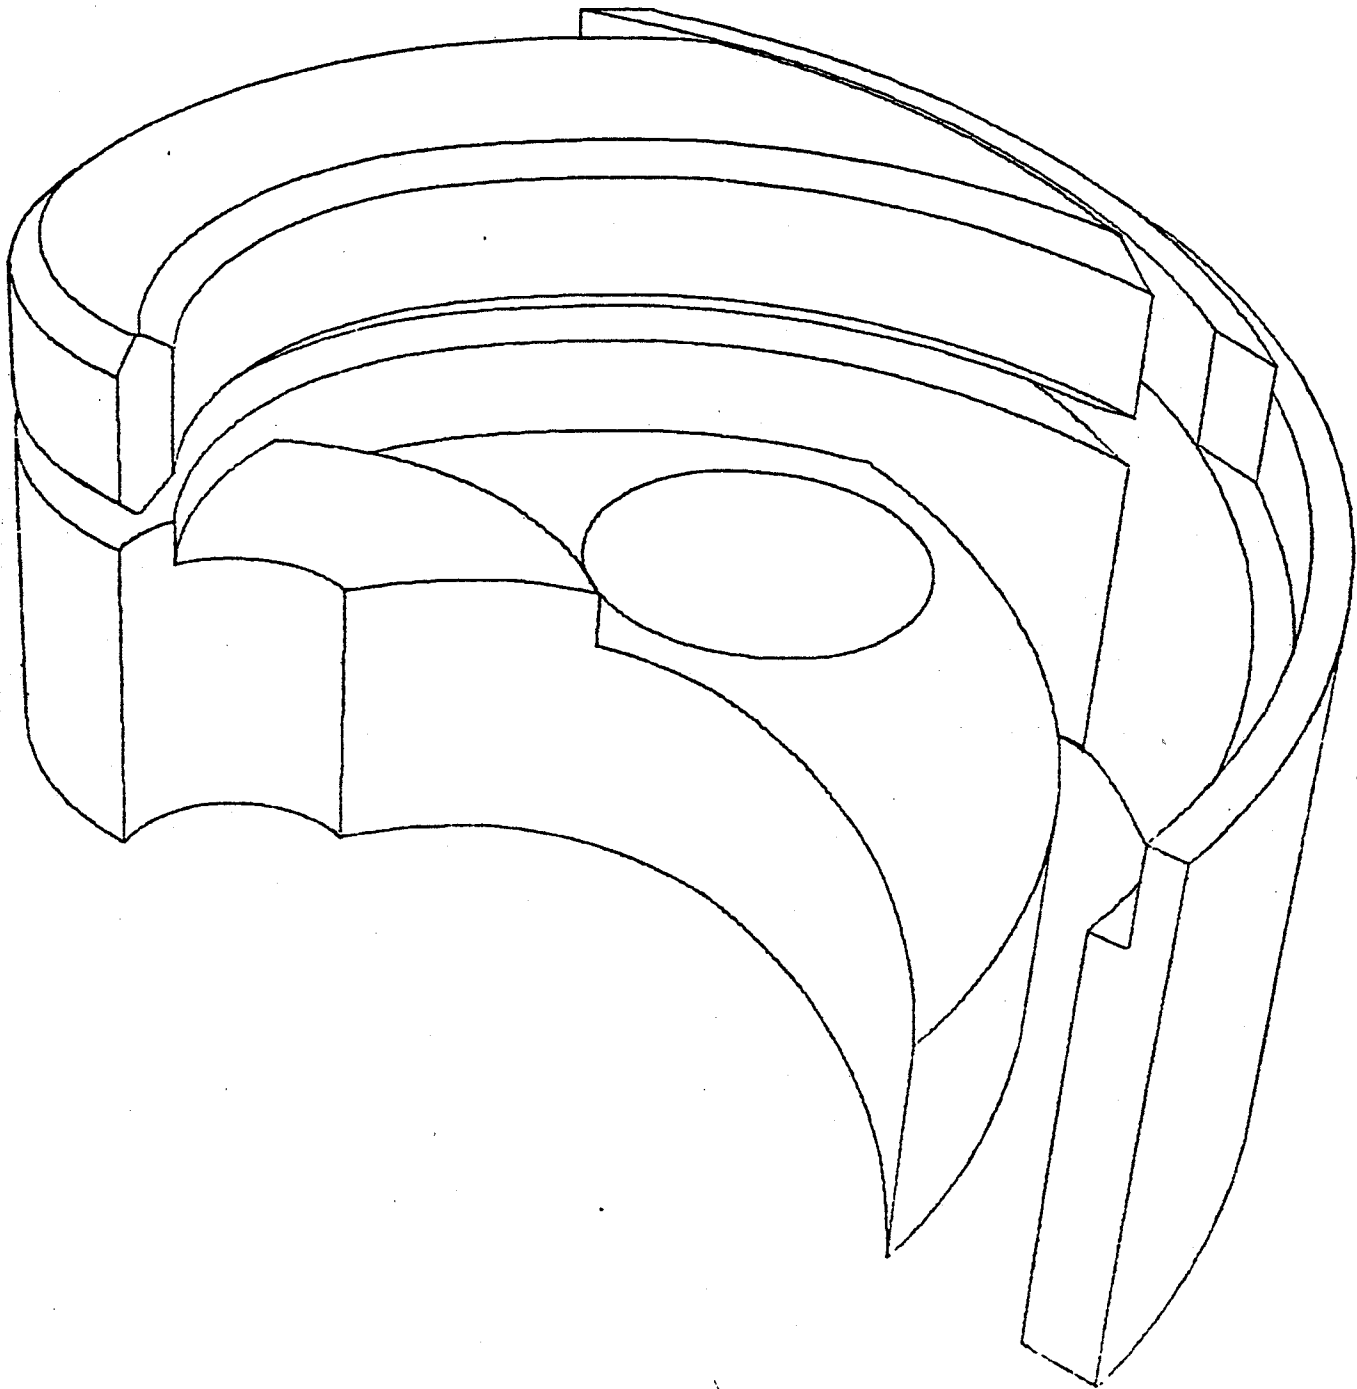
Perspective view of a sector for the K-500 pole tip geometry.
